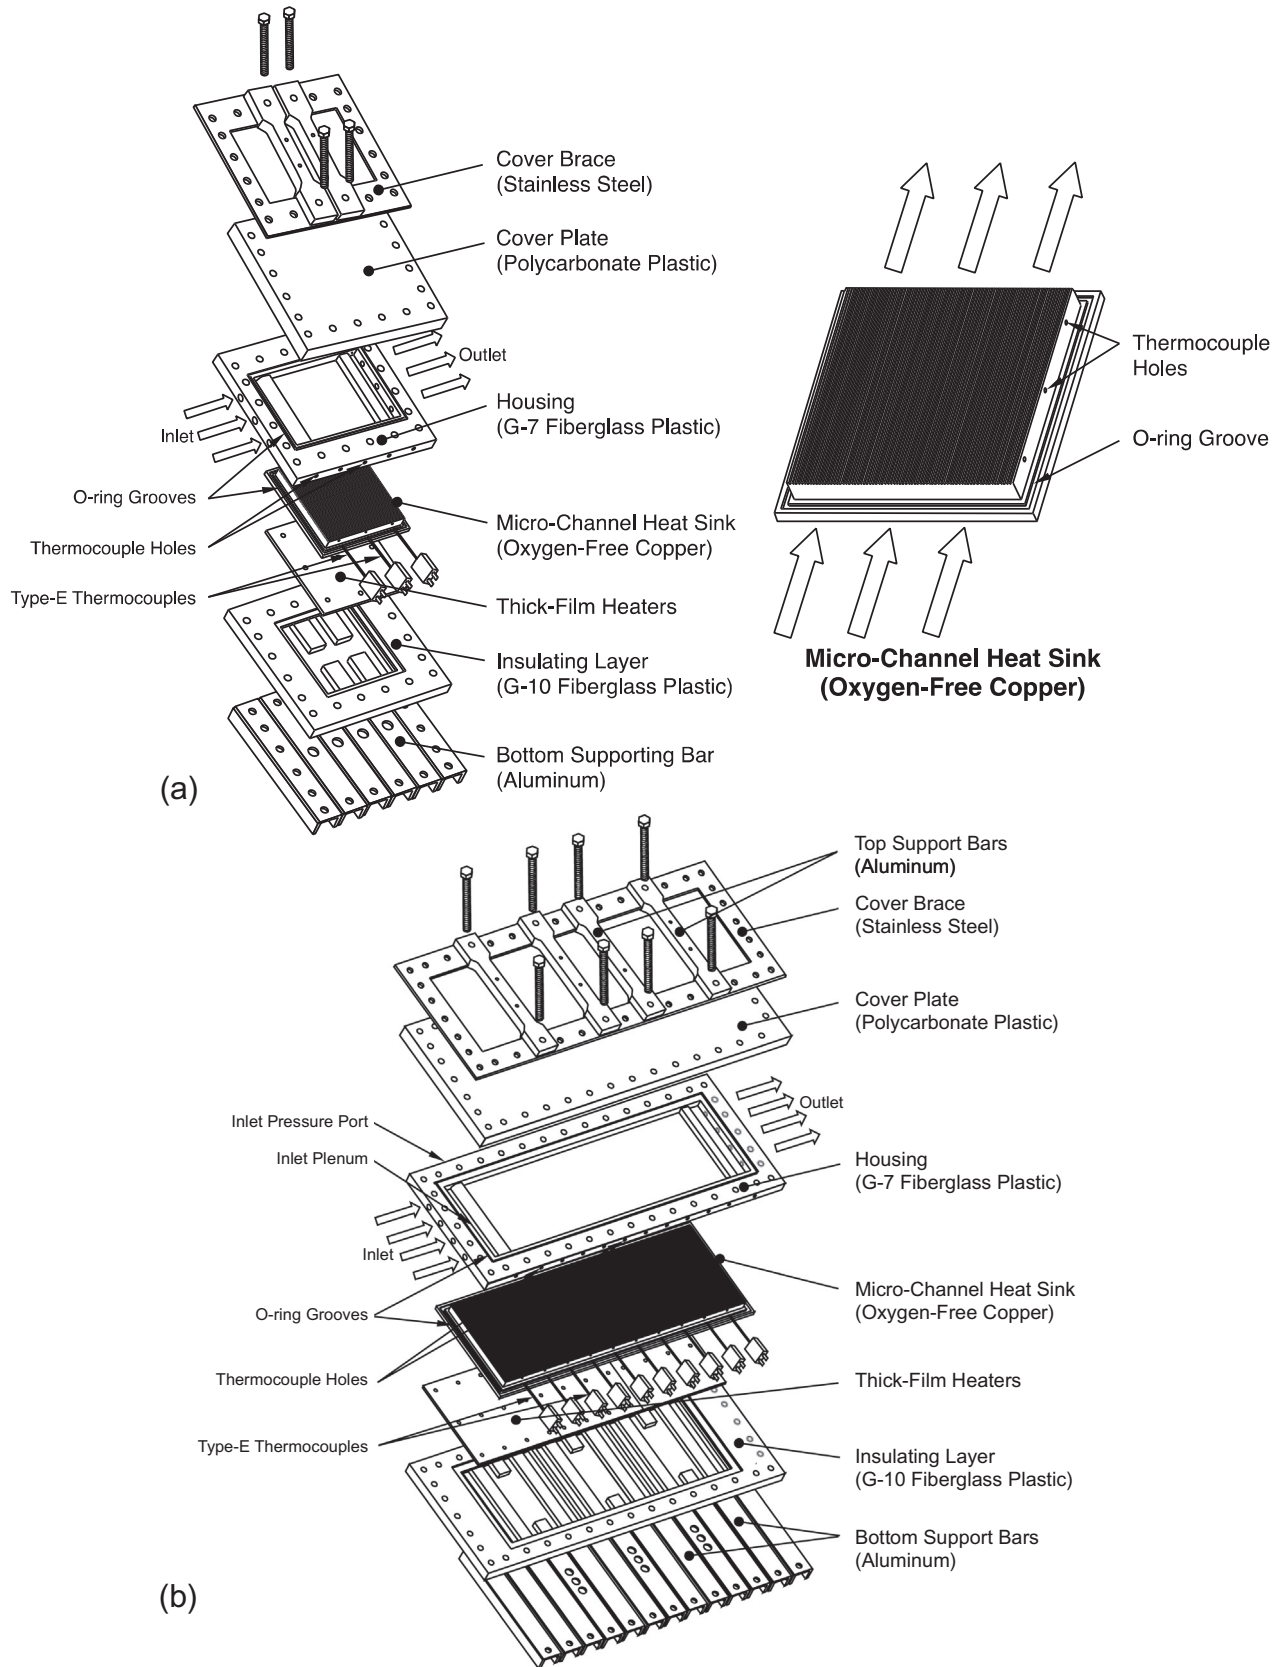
Exploded views of (a) crew H/X and (b) avionics H/X.
